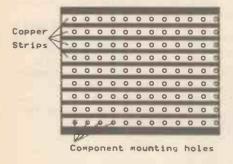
Stripboard consists of rows of copper strips on an s.r.b.p. board with a matrix of component mounting holes.
